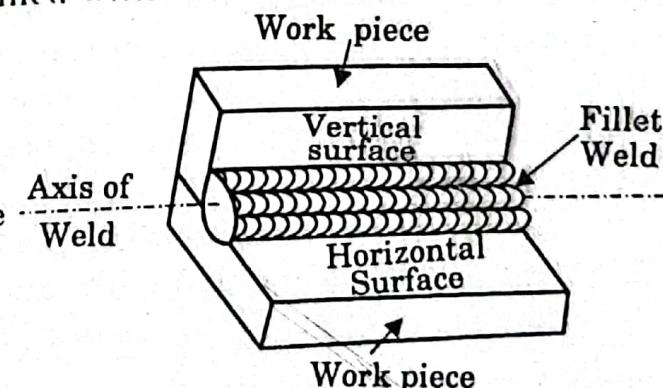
Horizontal welding position—fillet weld.
